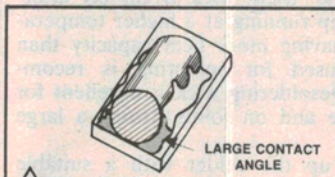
Too little heat. The solder forms a large contact angle with the surface and may be prised loose. Reheat the joint to fix this one.
